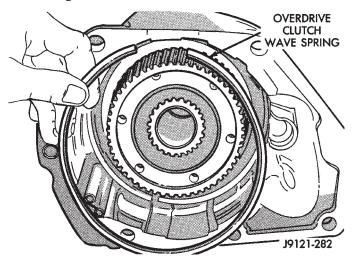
Removing/Installing Overdrive Clutch Wave Spring
